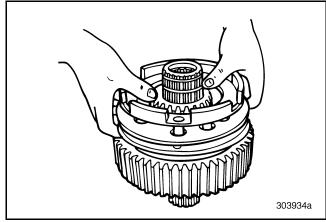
Removing Synchronizer Assembly (T313L/T318L Shown)
